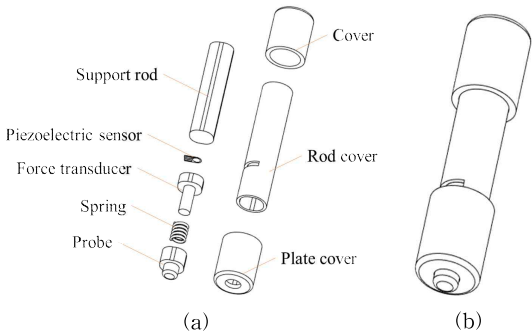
(a) Exploded view and (b) design modeling of proposed measuring device.
